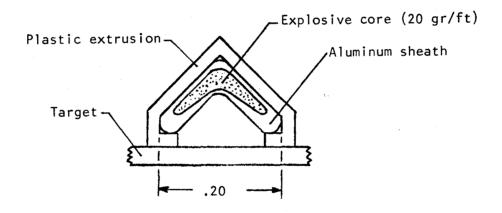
Cross section of B-1 flexible linear shaped charge.
